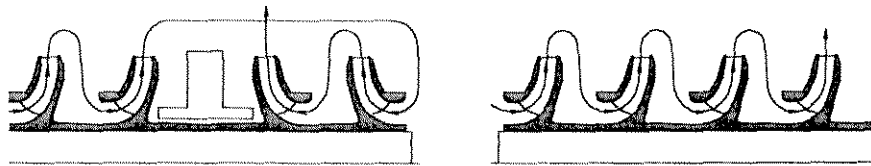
Multi-stage pump in back-to-back impeller arrangement
